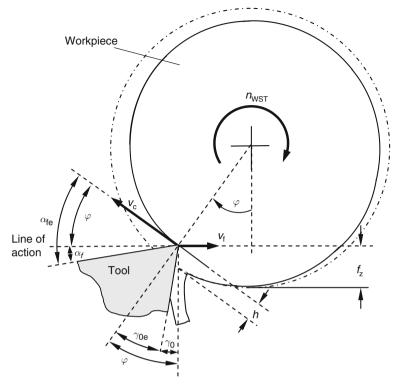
Kinematics of external cylindrical broaching with a reciprocating tool according to BERKTOLD [Berk92]
